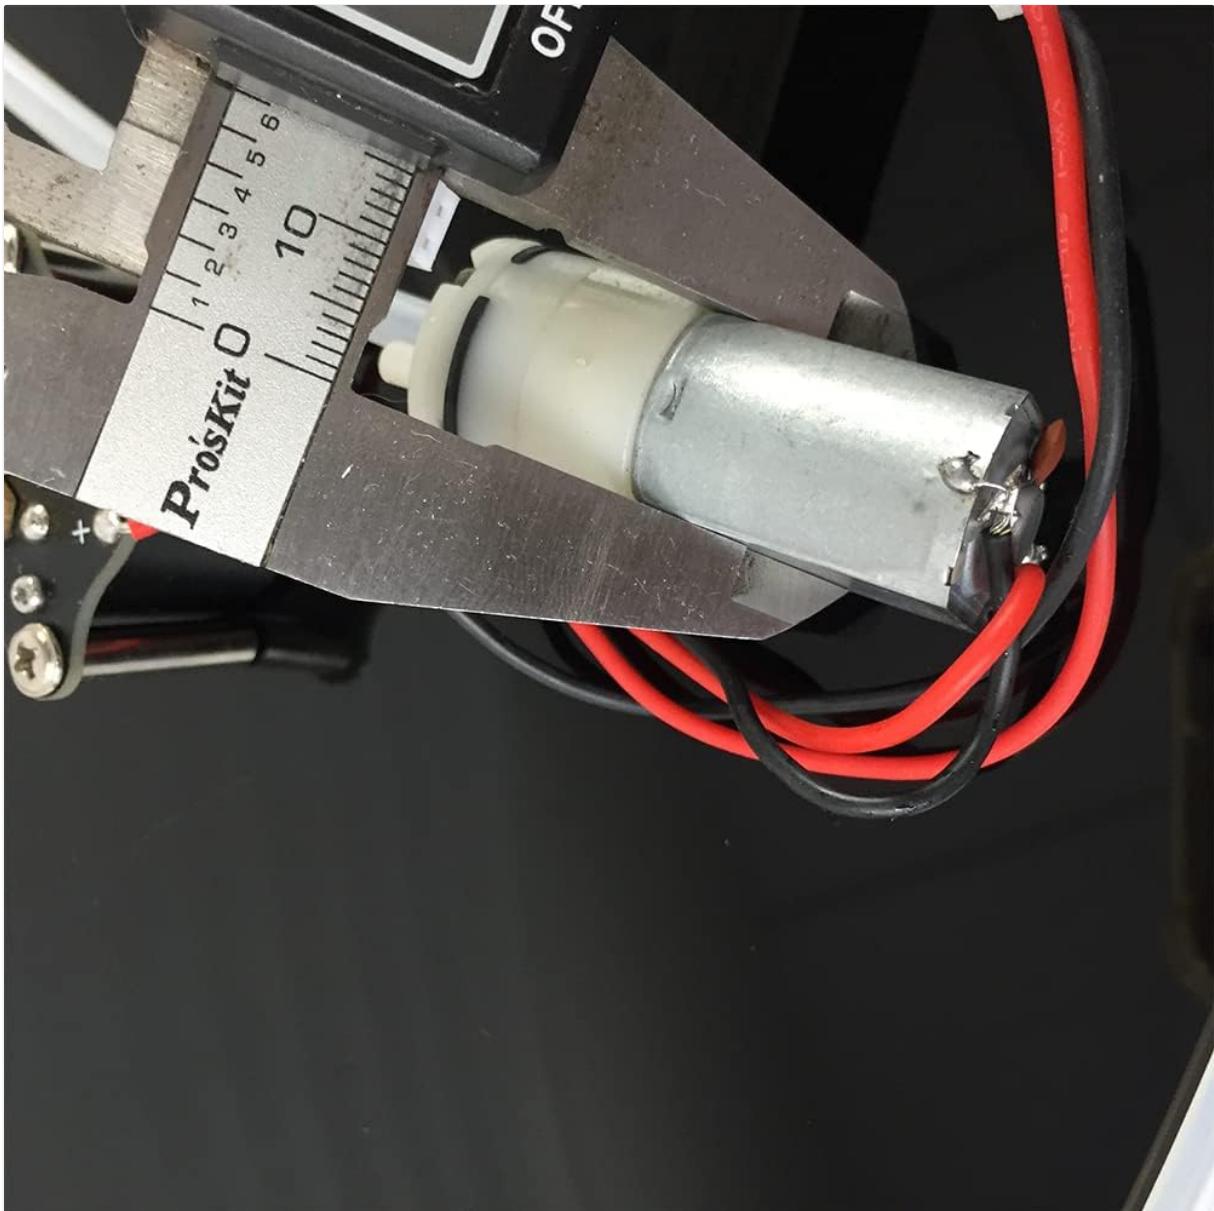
Caliper measurement showing the length of the smoke generator motor.
